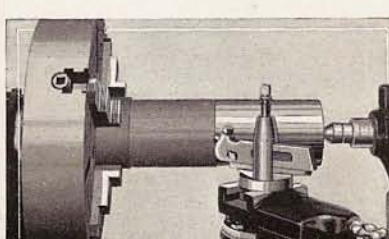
Finishing a Cast Iron Cylinder Sleeve for Press Fit in a Cylinder Block.
